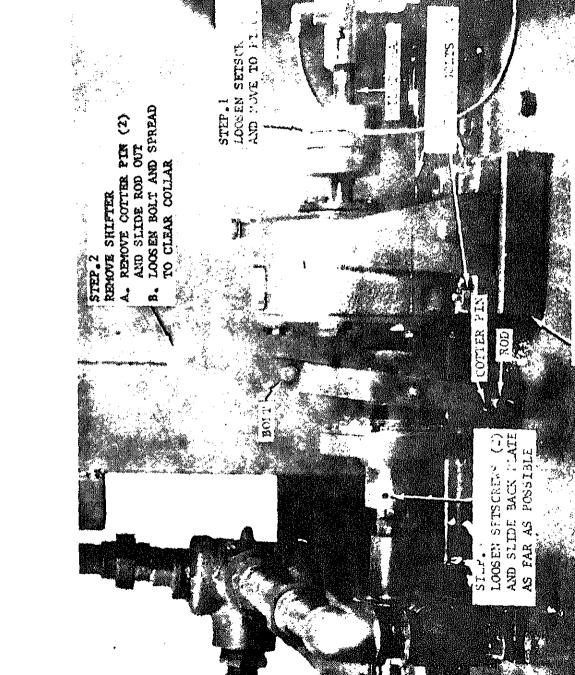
Flexible coupling, removal, disassembly, installation and assembly.
